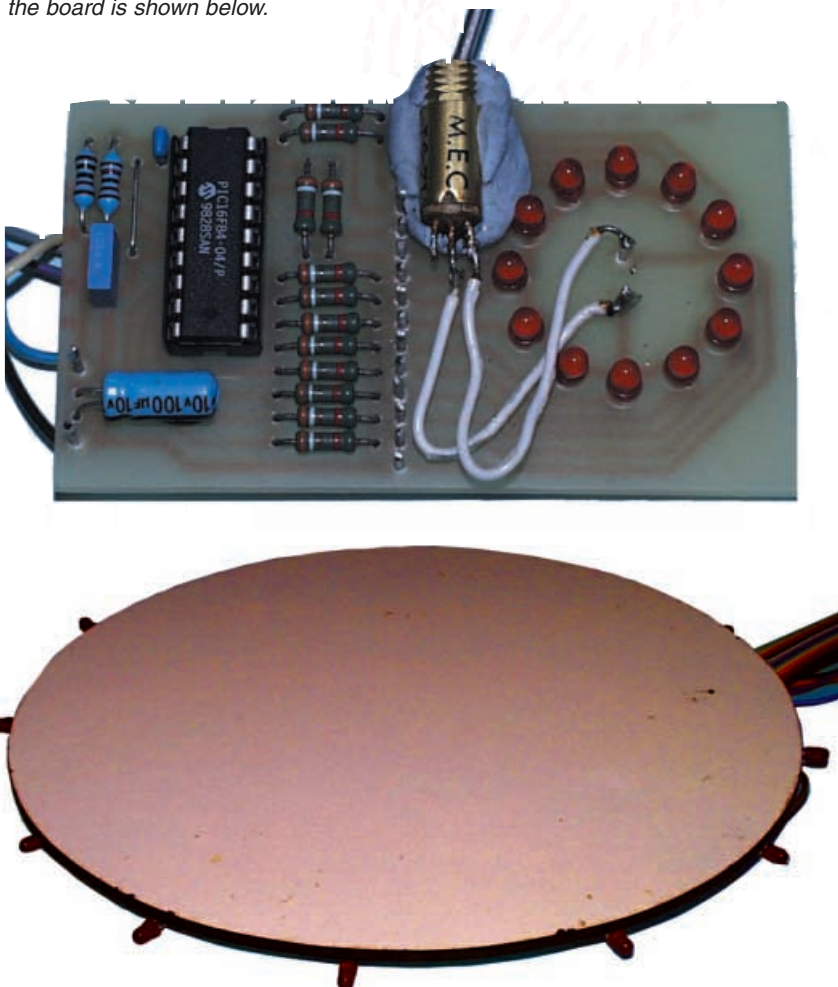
PICtogram printed circuit board (p.c.b.) component layout and full-size copper foil pattern. The completed p.c.b. with the "programming" switch attached to the board is shown below.
